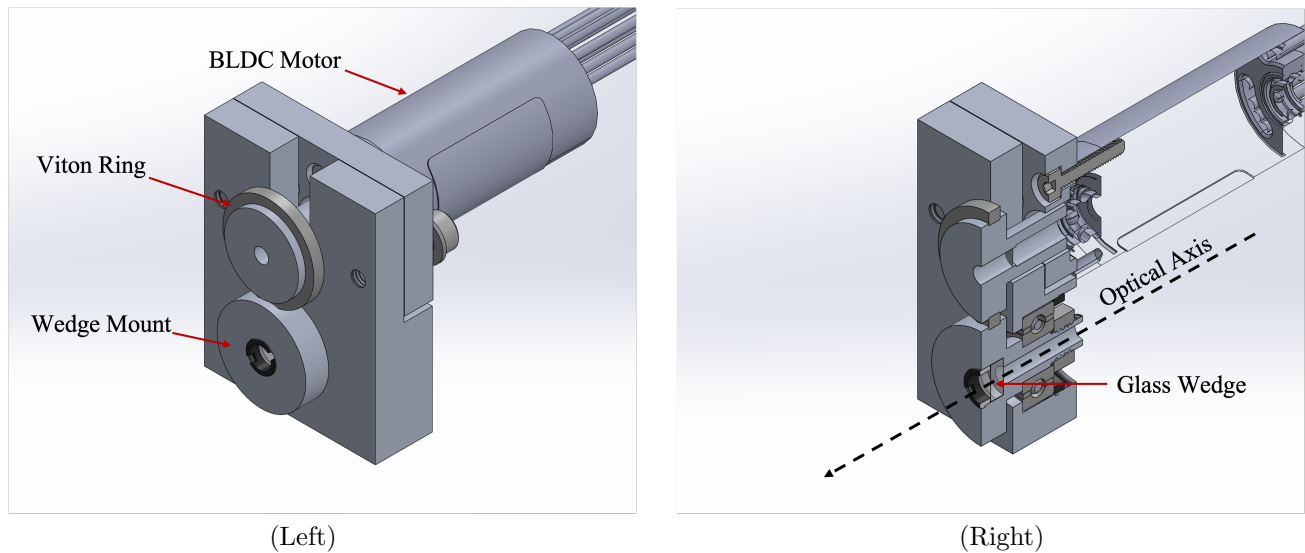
(Left) Model of the beam modulator assembly. A Viton O-ring around a disk is attached to the motor shaft. The O-ring makes contact with the wedge mount, which holds the modulating wedge. (Right) A cross-section view showing the glass wedge and the optical axis.
